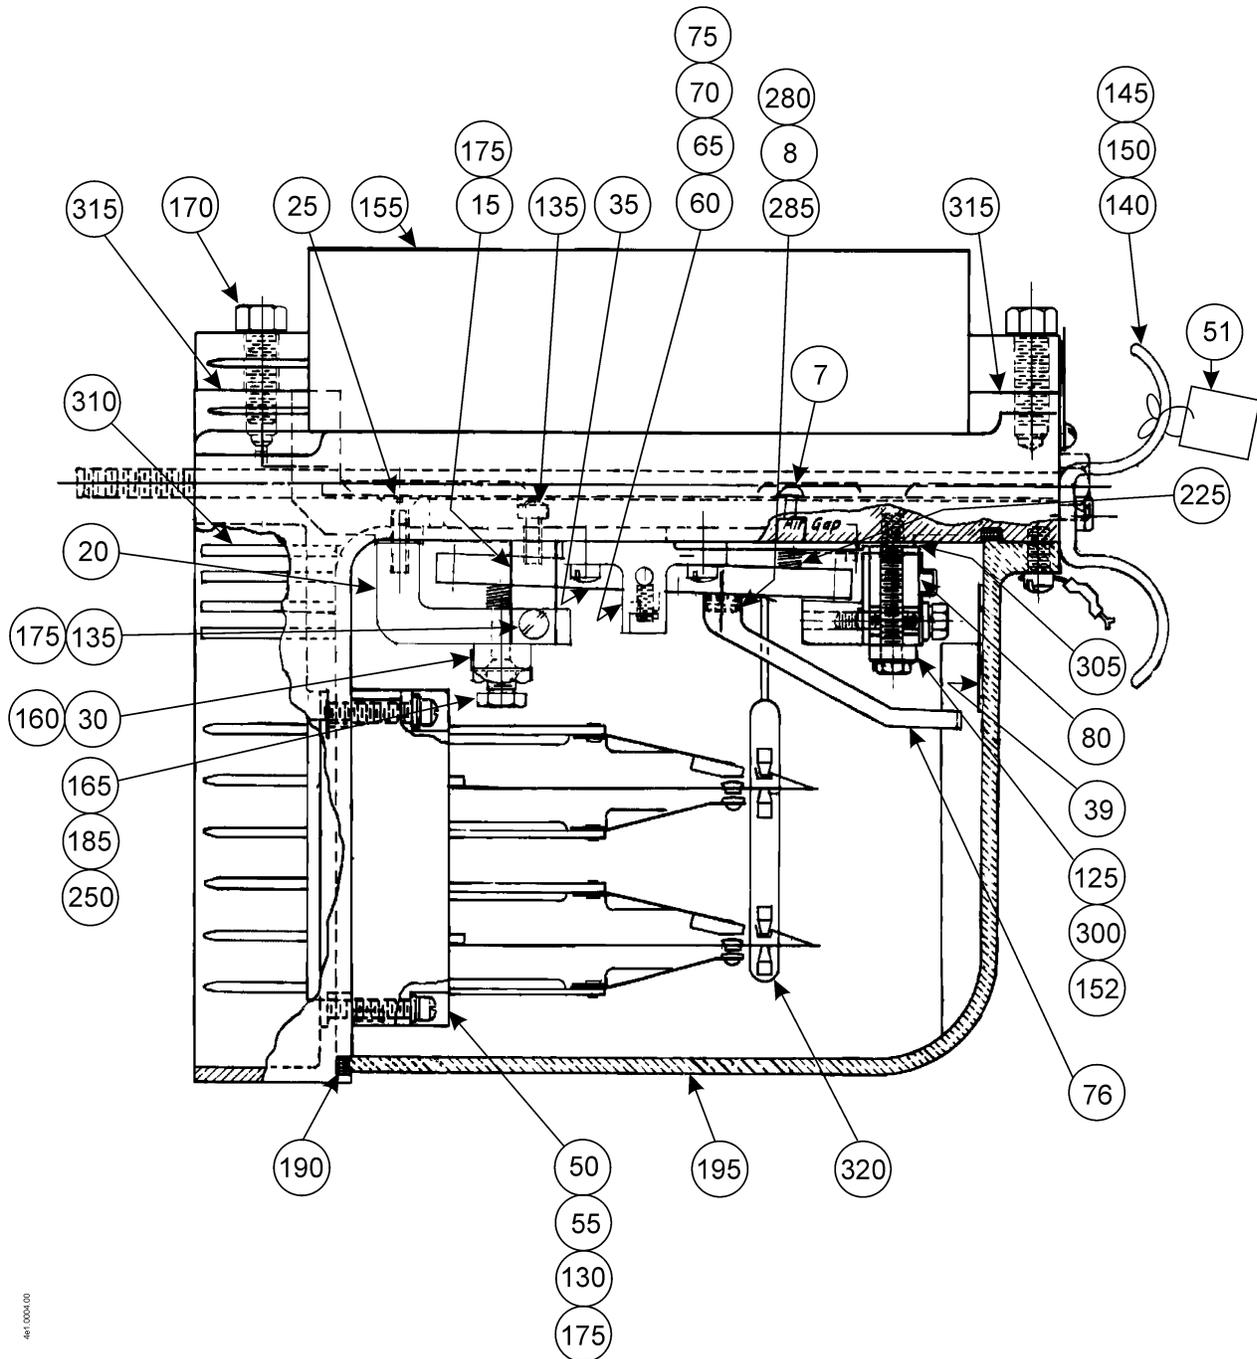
PN-159B Relay Parts Detail (Sheet 1)
